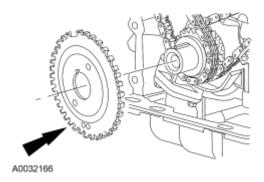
View Of Crankshaft Sensor Ring At Crankshaft Courtesy of FORD MOTOR CO.
